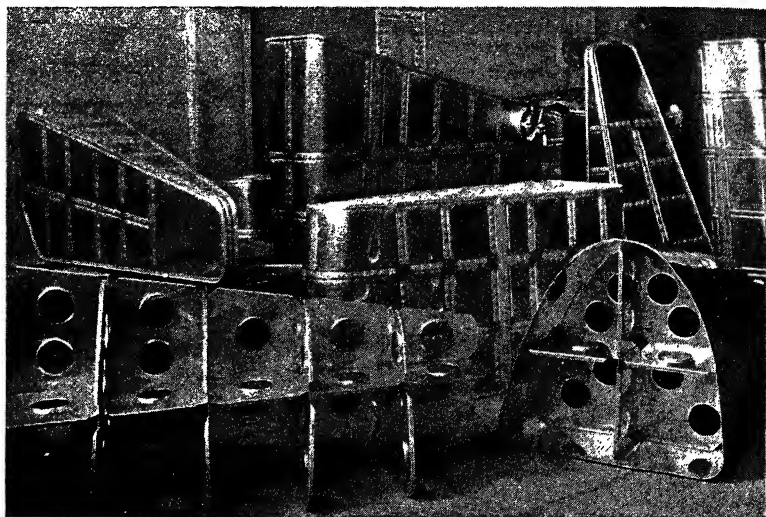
Aluminum fuel tanks. Welded edges, flat seams and rivet heads.
